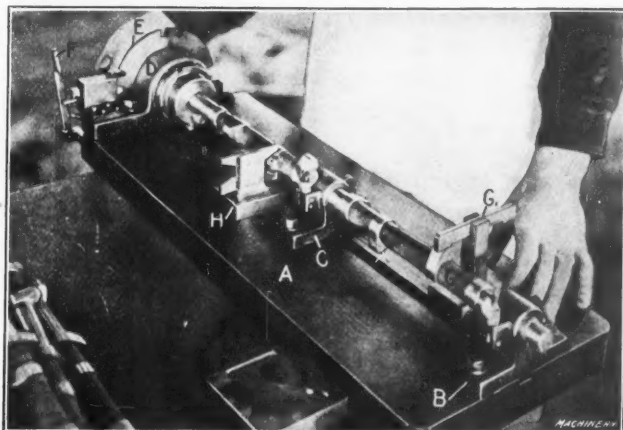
Fixture used in Testing Shape, Lift and Angularity of Cam-shafts
